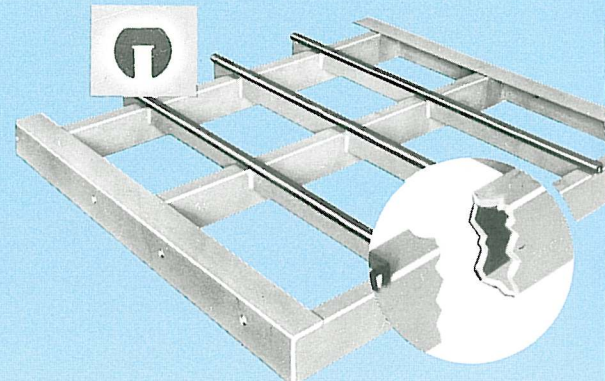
Standard "automatic" spring tension assembly at both sideplates on 6' wide units with center hold down.
